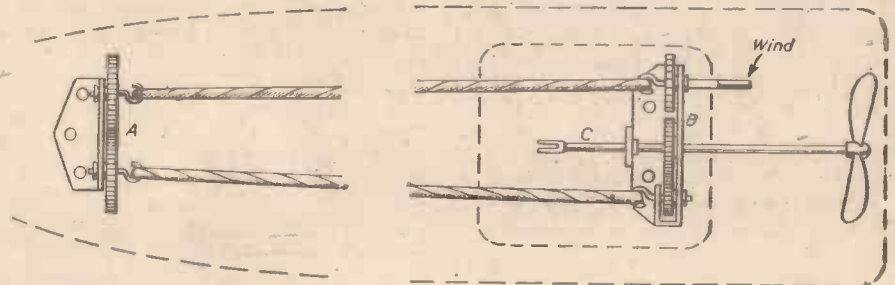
General arrangement of elastic driven motor fitted in a model speed boat.
